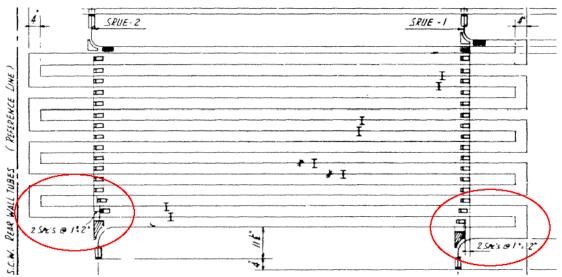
Upper LTSH Assembly - Highlighted Support Attachment Offsets
